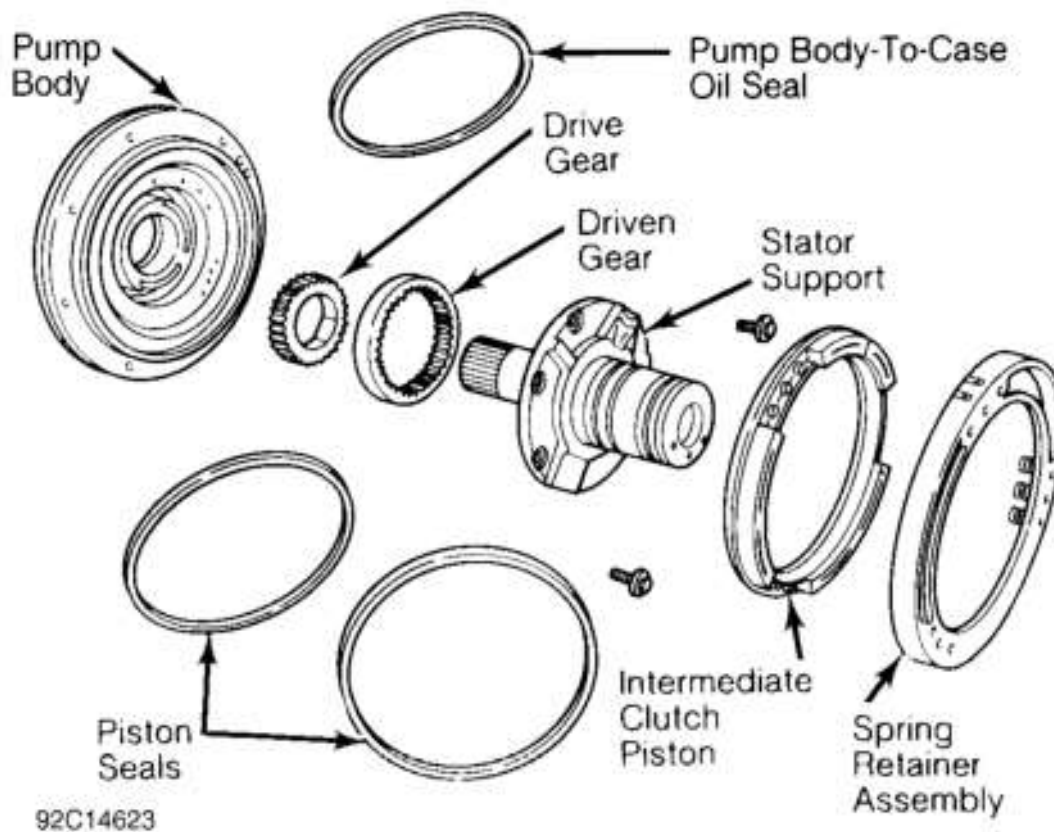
Exploded View of Oil Pump & Intermediate Clutch
